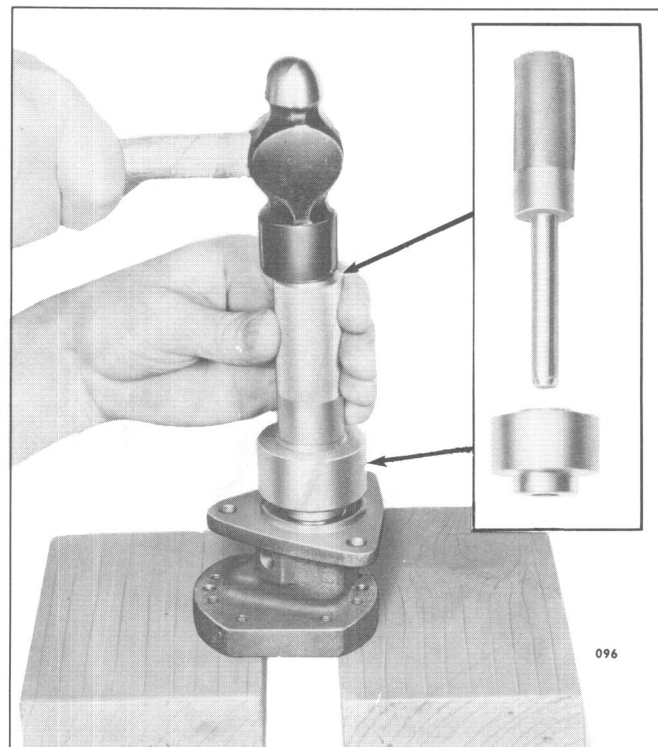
Installing Outer Oil Seal using Tools J 1508-8 and J 1508-9
